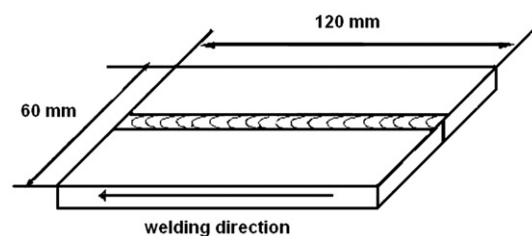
Schematic representation of the samples used in the GTA welding of magnesium AZ91D alloy.
